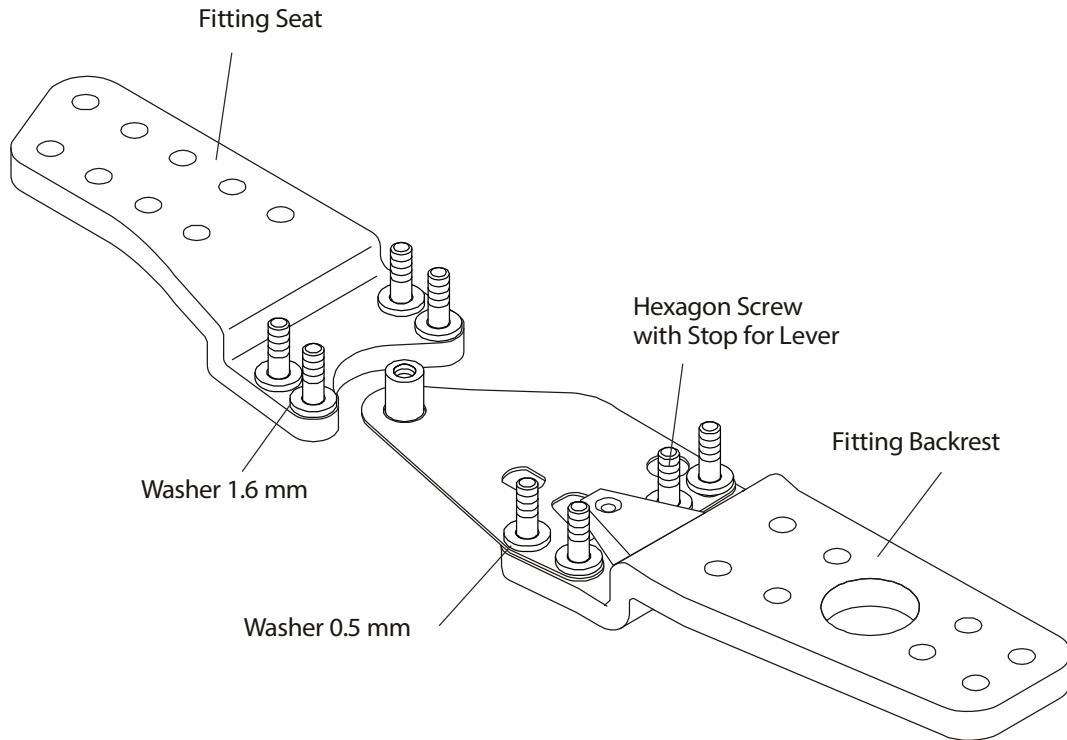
Arrangement of the Fitting Seat, Fitting Backrest and Screws (LH side shown, if OÄM 40-252 is installed)
